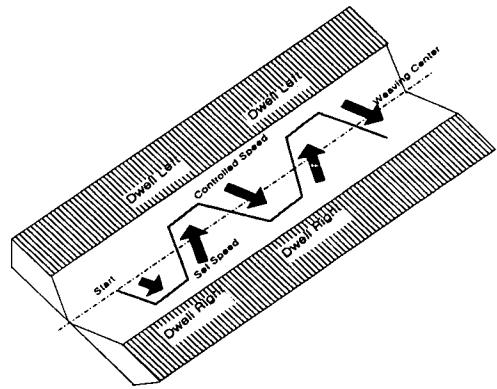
Weaving and control pattern of fill pass welding
